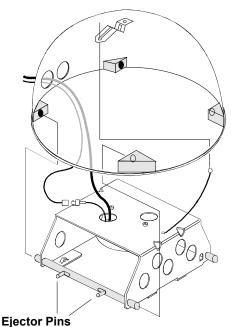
Attaching the mounting base to the adapter bracket
